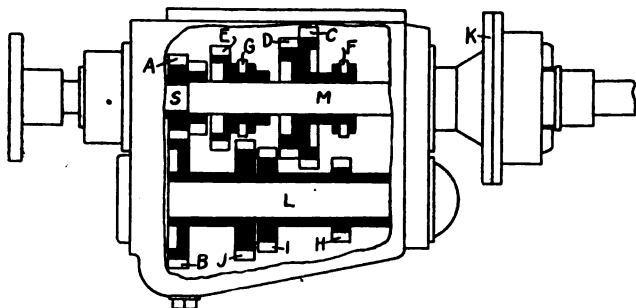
Location of Gears at the Neutral Position in the Gear-Set
